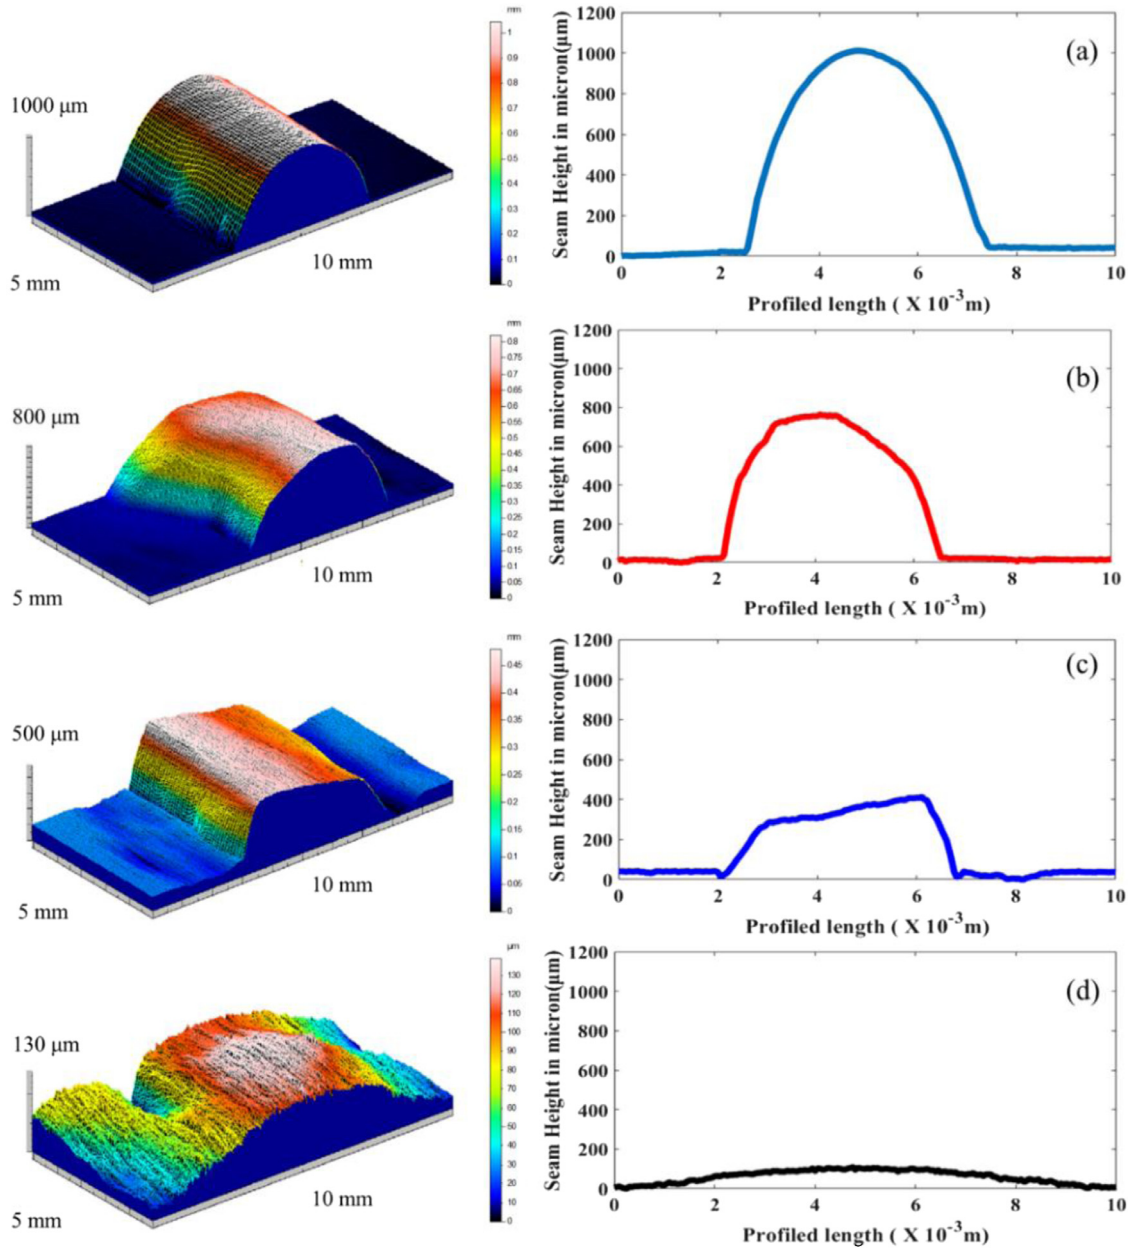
(a) 3D and 2D profile extracted from across weld seam before belt grinding process (State-1); (b) 3D and 2D profile non-symmetrical profile extracted across the weld seam size when 30% is removed (State-2); (c) 3D and 2D profile non-symmetrical profile extracted across the weld seam size when 70% is removed (State-3). (d) 3D and 2D profile extracted when the weld seam is distinctively removed (State-4).
